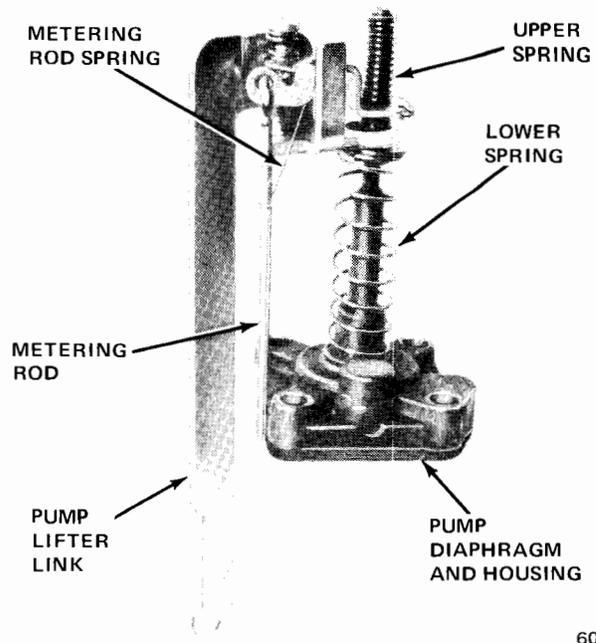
Accelerator Pump and Metering Rod Assembly
